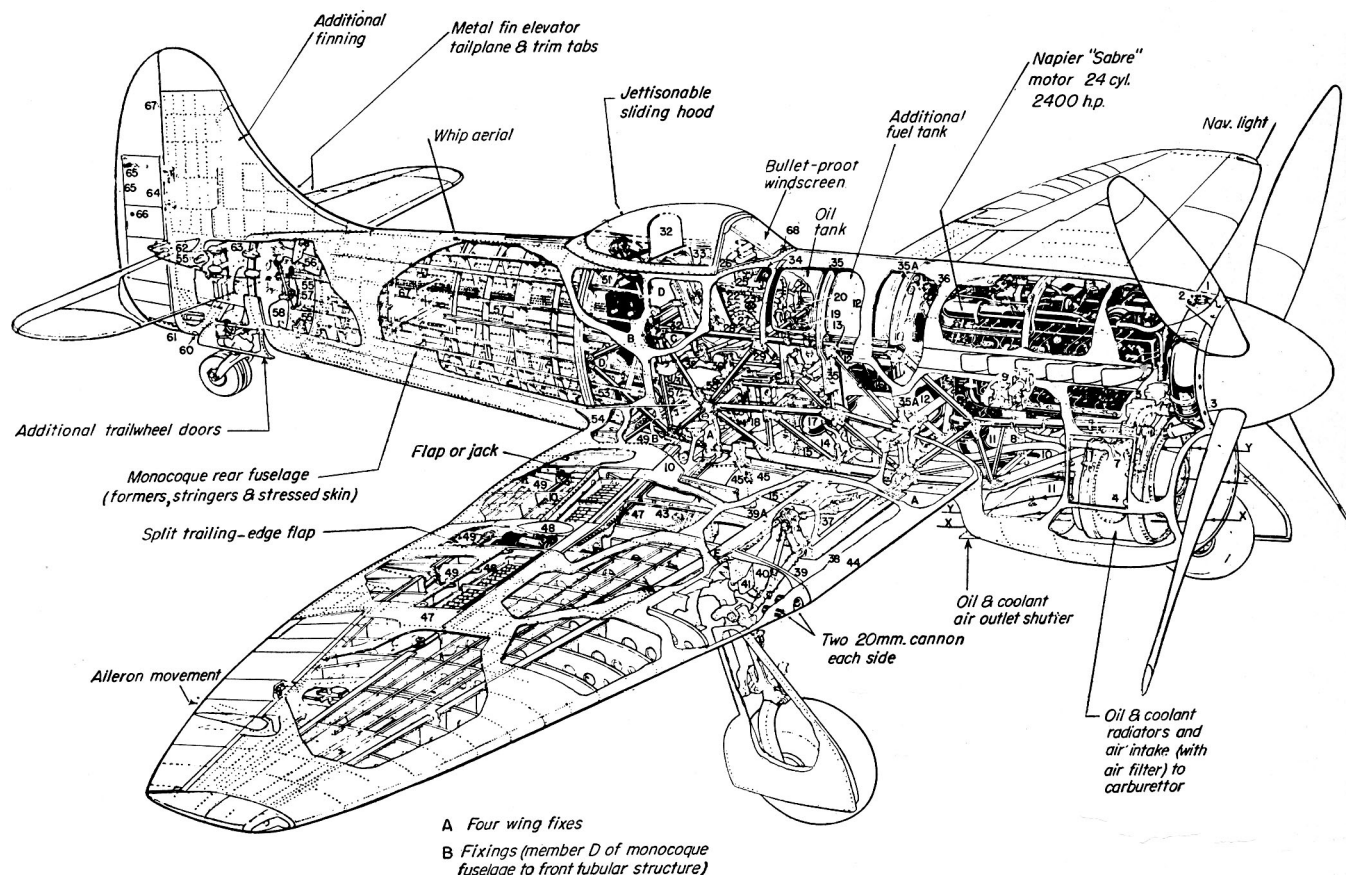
Cutaway drawing of the Hawker Tempest V powered by the Napier Sabre IIB engine.
